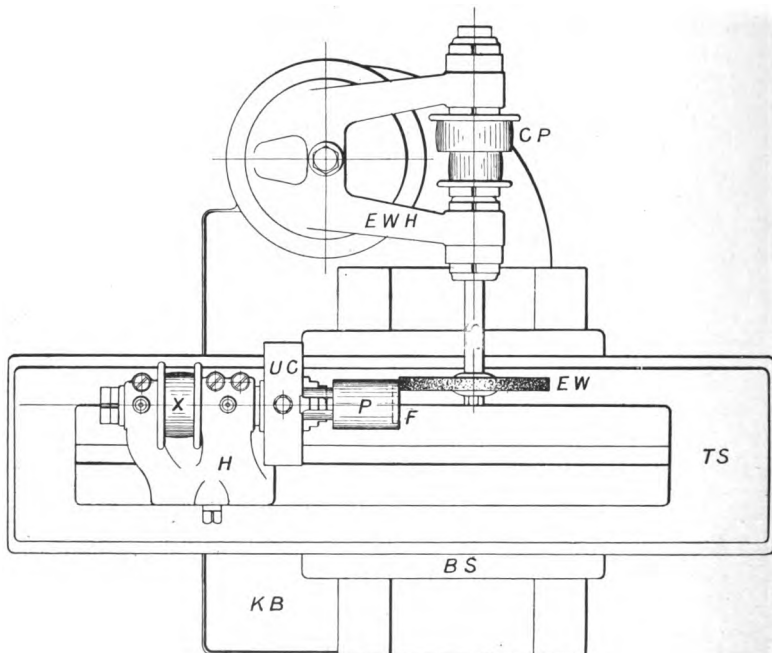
"Ward" Machine grinding Face of Press Punch.
